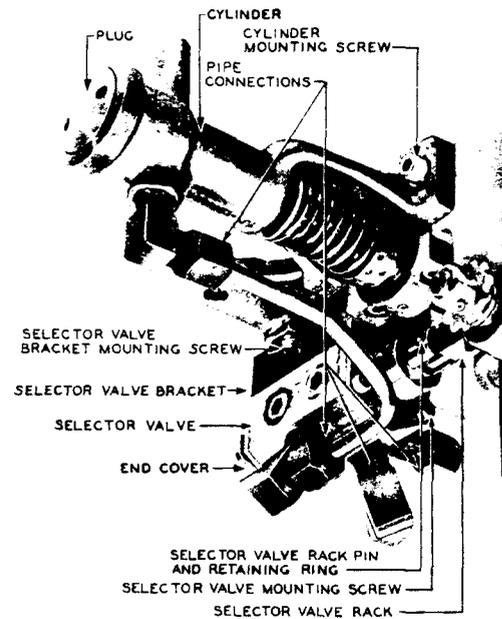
Tab-Clipping Control Unit (partial view from below right front of table with selector valve gear rack cover and chain removed) — 659A and 659D Tools Only
